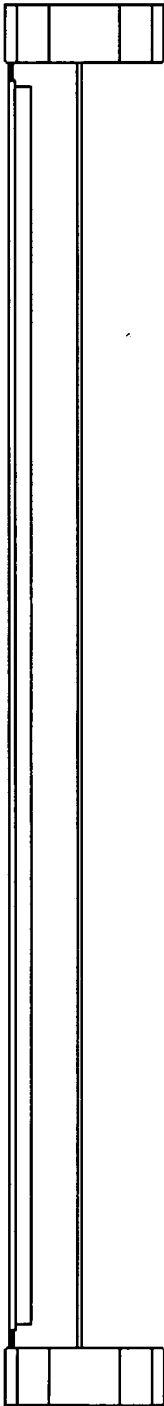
A: Right view of a ceiling frame (40 foot collapsible cargo container)
